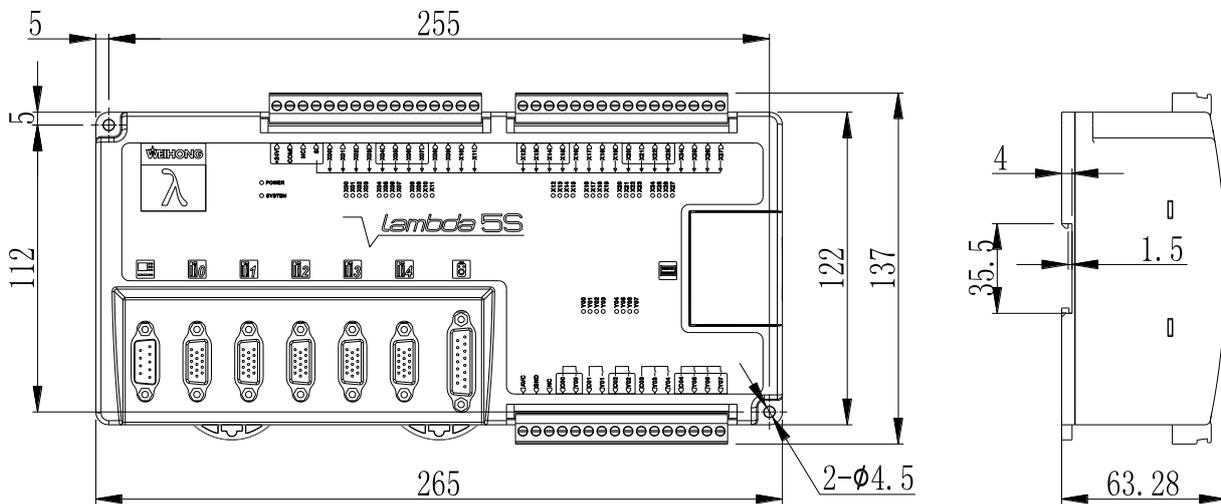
Dimensional drawing of Lambda 5S controller
